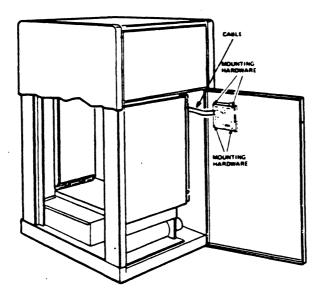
CABINET FRONT PANEL REMOVAL
